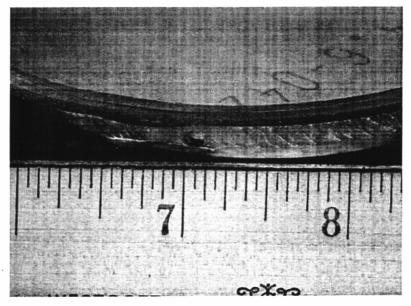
Photograph of a defective closure weld on a stainless steel storage container that led to an incident in September 1999 at Savannah River, causing uptake of plutonium by seven personnel and extensive vault contamination. This event is described as case Seal-9 in Table 1.
